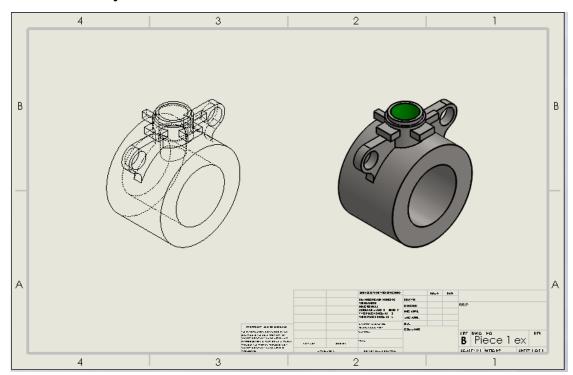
3-Dimensional Sketch of Valve Body
